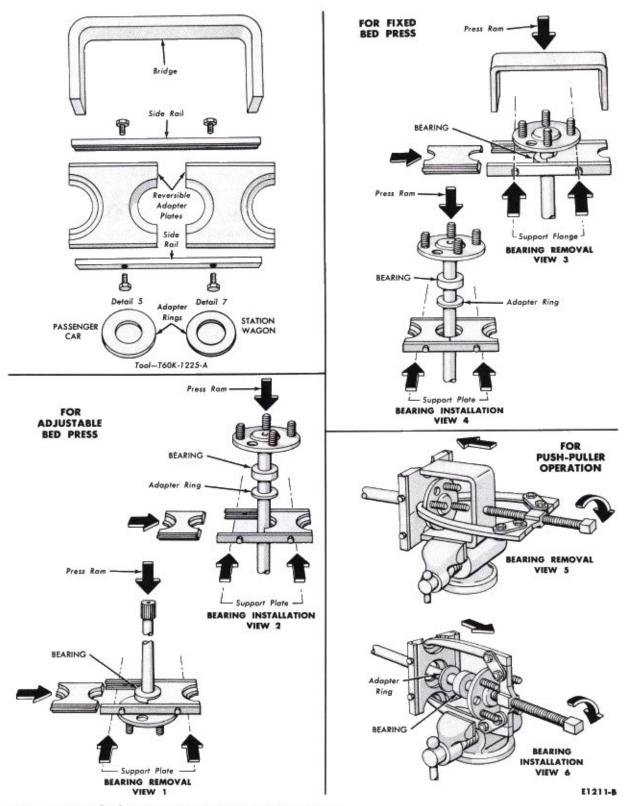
Rear Wheel Bearing Removal and Installation-Falcon
